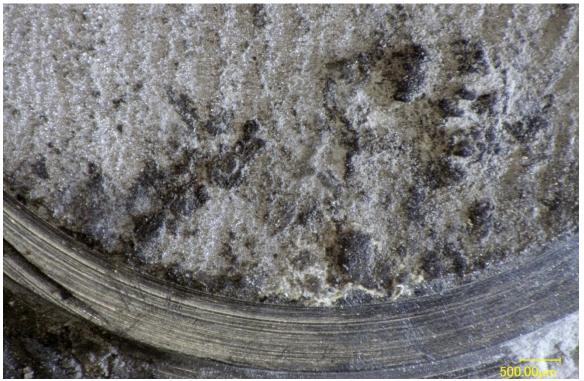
Closer view of the lower portion of Figure 4, showing the the region the fracture originated.
